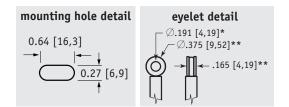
Outline Drawing (36 oz. cable tension only)
